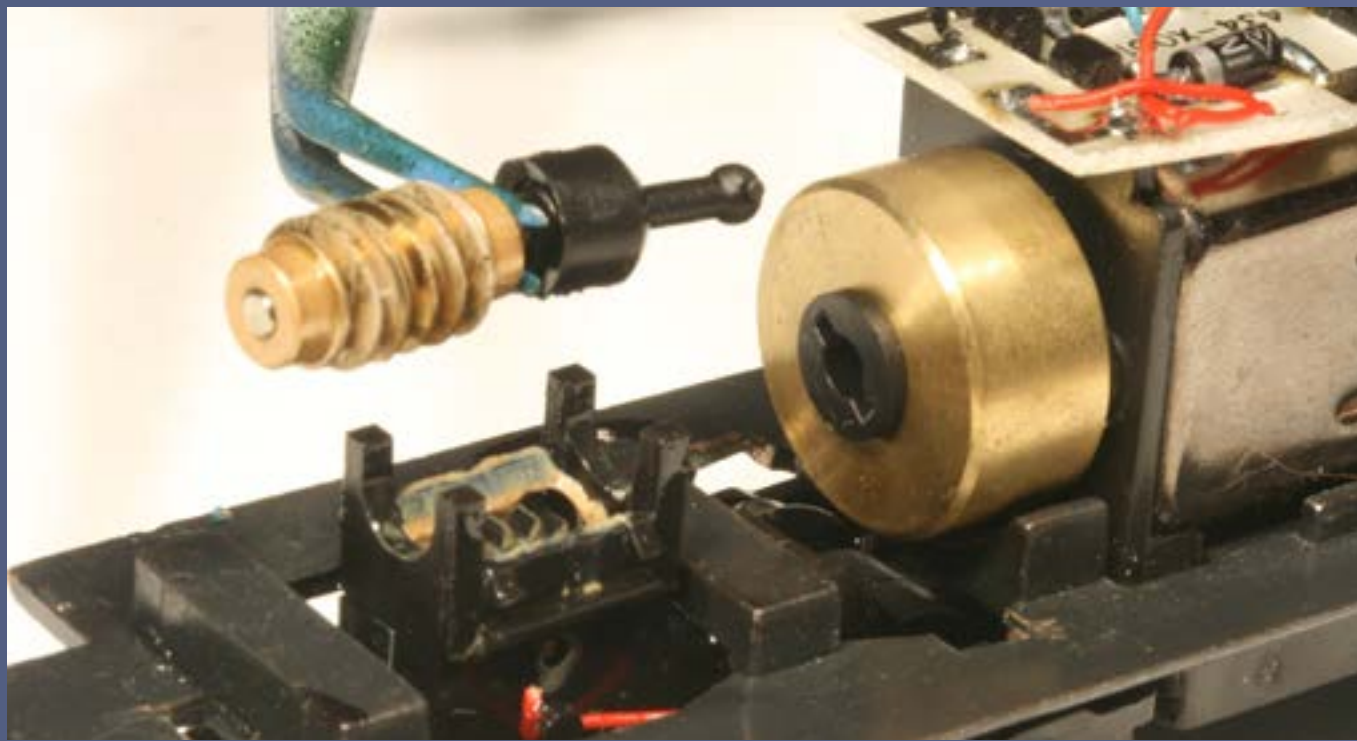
The second step in disabling the drivetrain is to remove the driveshaft and worm gear from the top of the gear tower.
